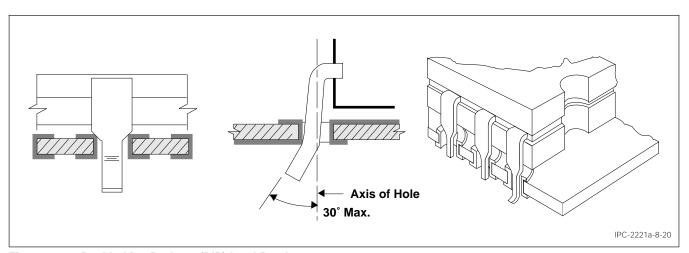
Dual In-Line Package (DIP) Lead Bends
